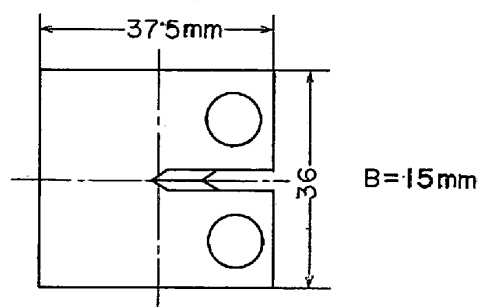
Dimension of the compact tension type fracture toughness specimen under plane strain condition.
